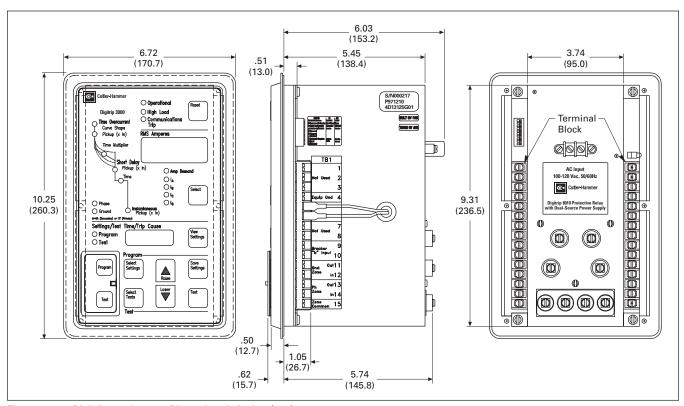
Digitrip 3010/3020 — Dimensions in Inches (mm)
